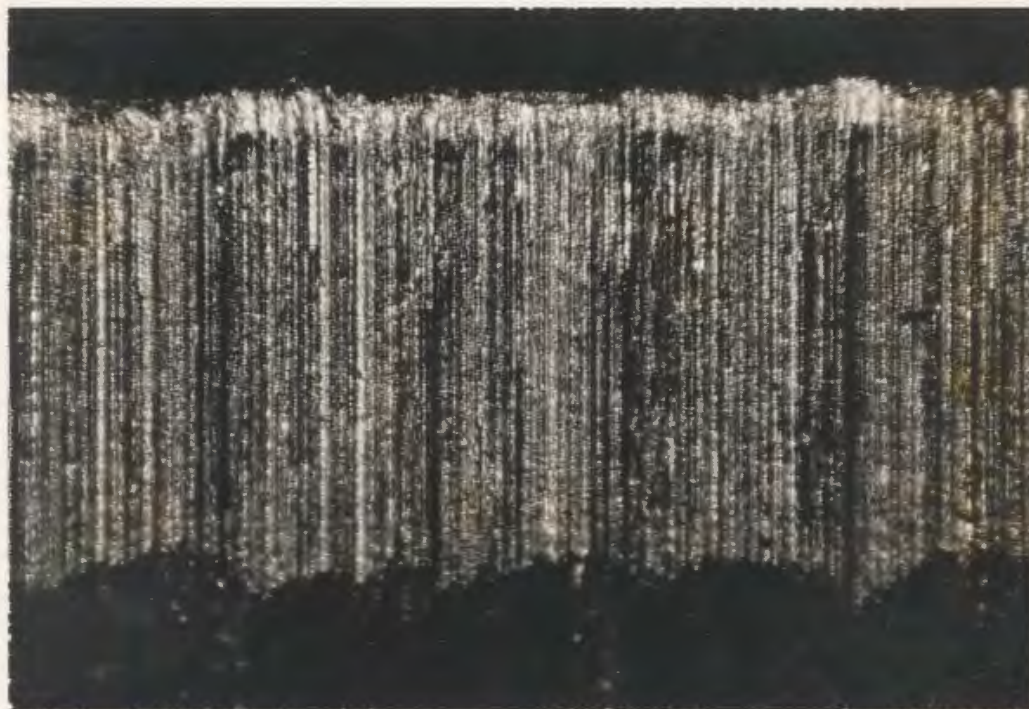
FLANK WEAR ON A CUTTER TOOTH SELECTED AT RANDOM. TWENTY-FIVE CUTS USING SULPHURIZED OIL AS A CUTTING FLUID. SAME TOOTH AS SHOWN IN FIGURE 6.26 AT A GREATER MAGNIFICATION
